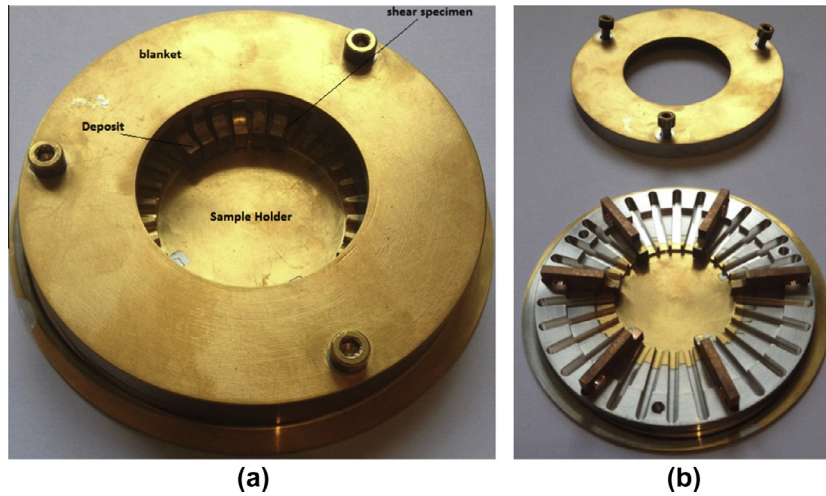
Designed deposition tool for sputtering deposition. (a) Assembled and (b) decomposed.
